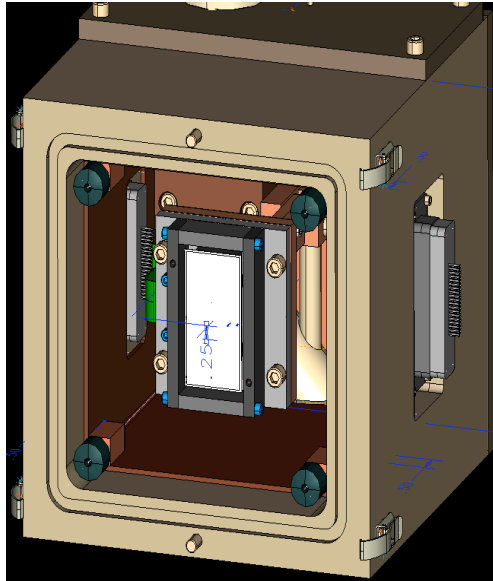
View of pedestal package mounted on the cold plate inside the test dewar
